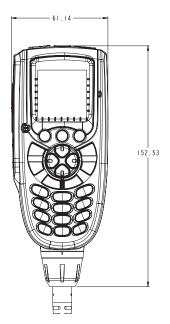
Front View of O3 Control Head with Coiled Cable
